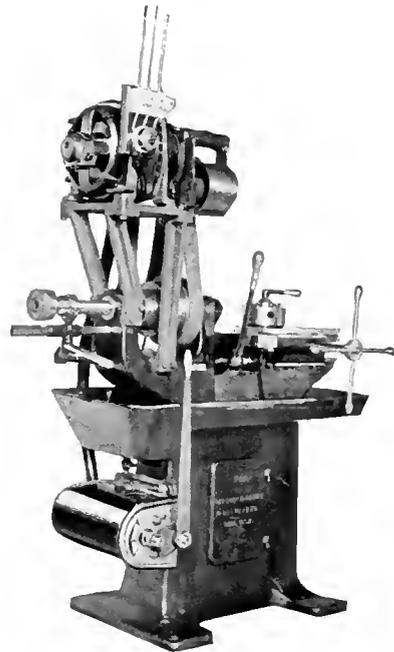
1 H.P. 4-Speed Induction Motor operating Bardons and Oliver Screw Machine
